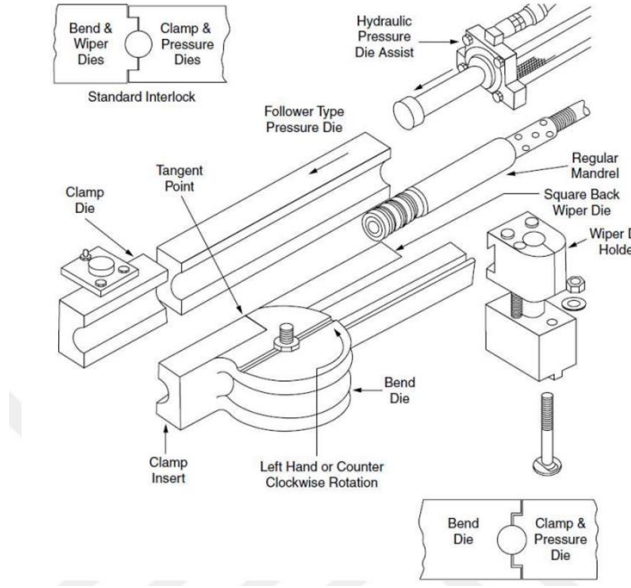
Push method tube bending process [9] (İtme yöntemi ile boru büküm)
